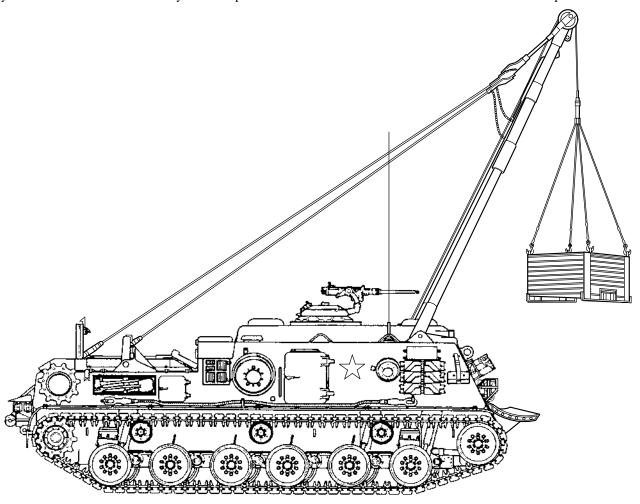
Hoisting Boom Assembly—Right-Rear View.
